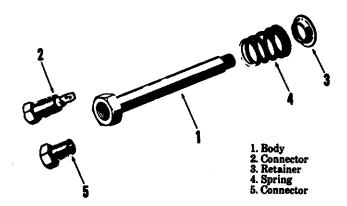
Fuel inlet and drain connectors, removal and installation.
